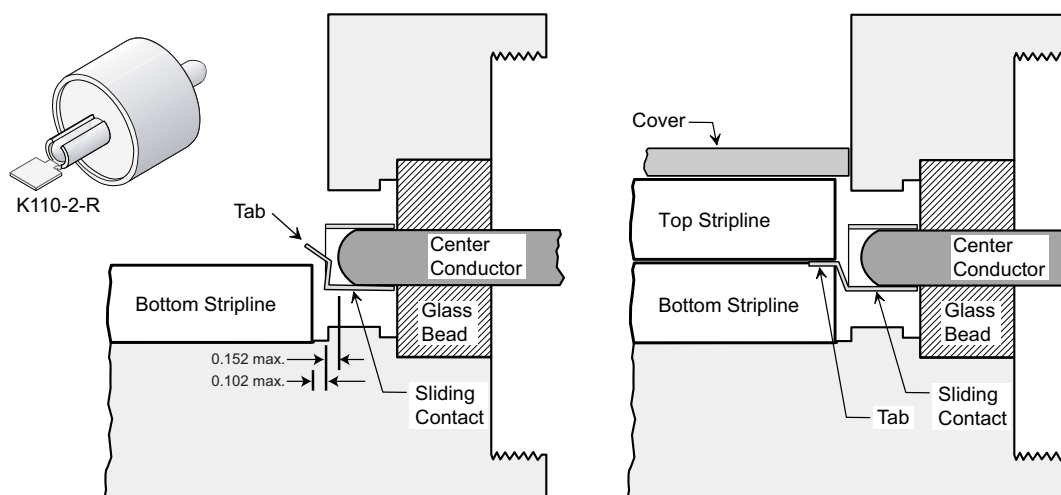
K110-2-R Sliding Contact Assembly, Method 2
